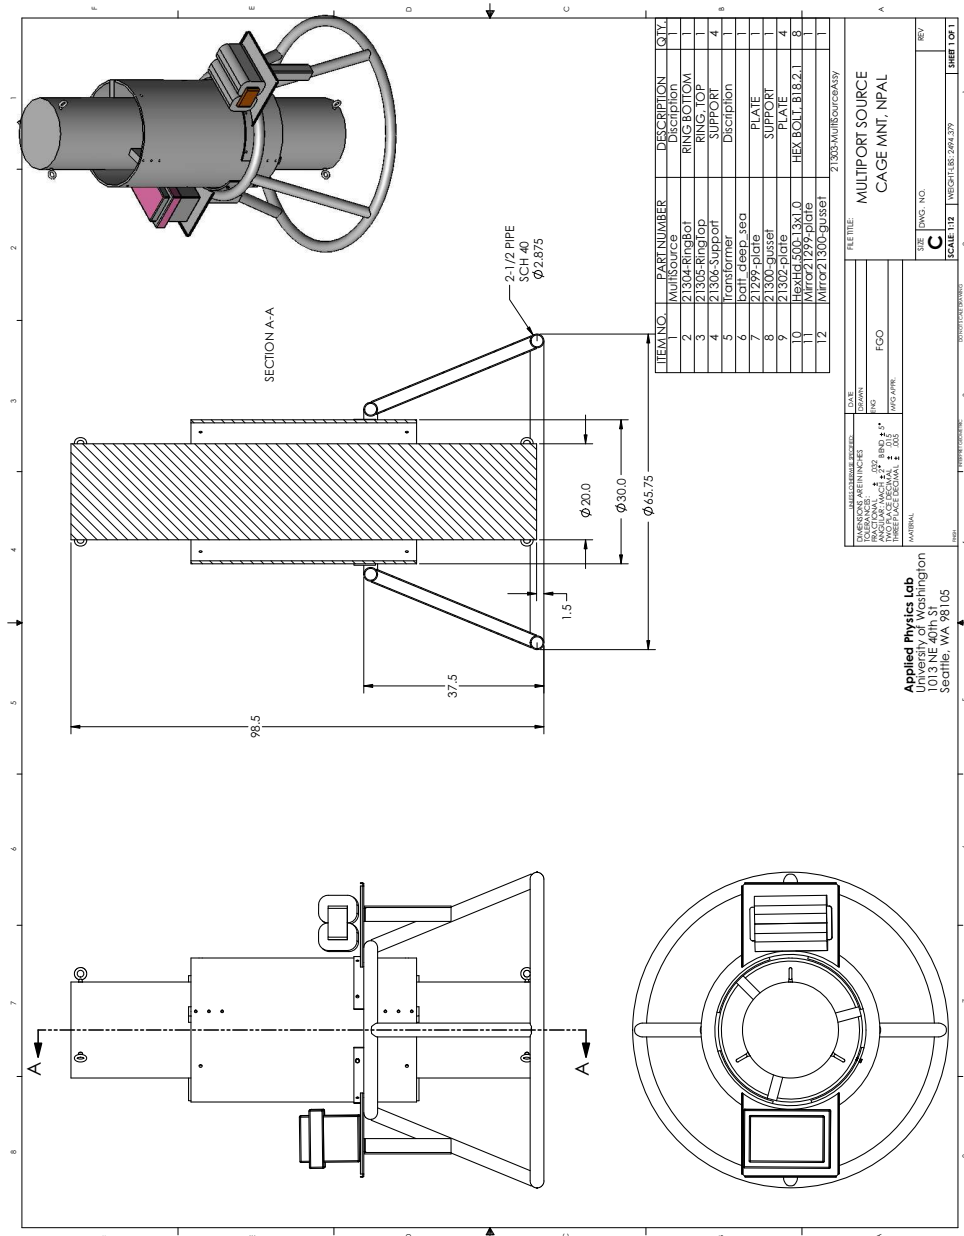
Engineering drawings, MP200/TR1446 assembly.
